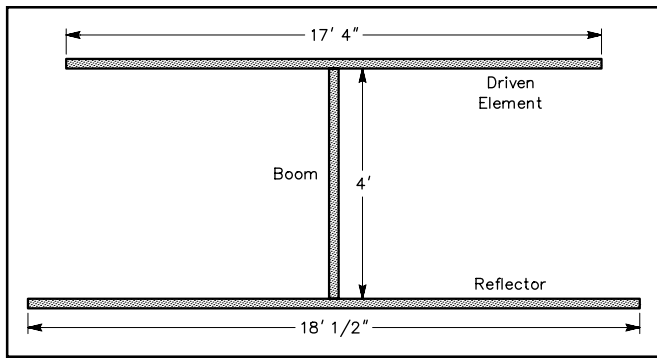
Dimensions and mounting configurations for the boom, driven element and reflector element.
